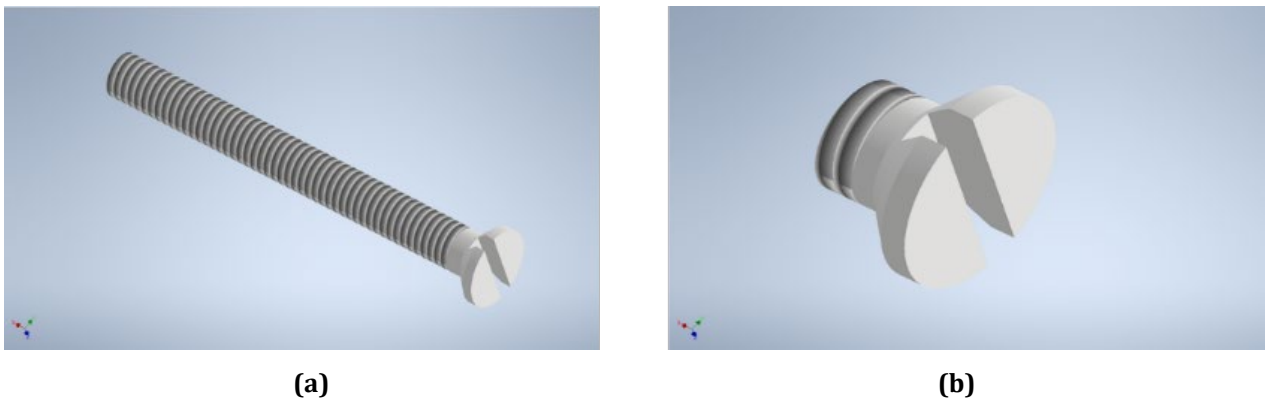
Standard fastener parts in the proposed laptop (a) M2.5x25 flat head screw; (b) M2.5x3 flat head screw
